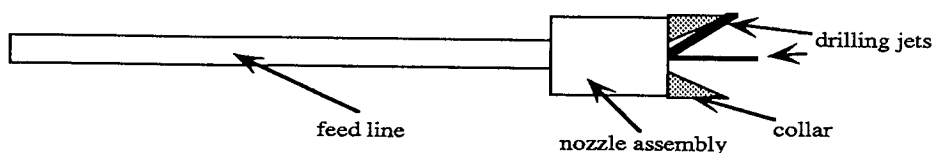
Plain jet with hole gaging collar attached to the drill head.
